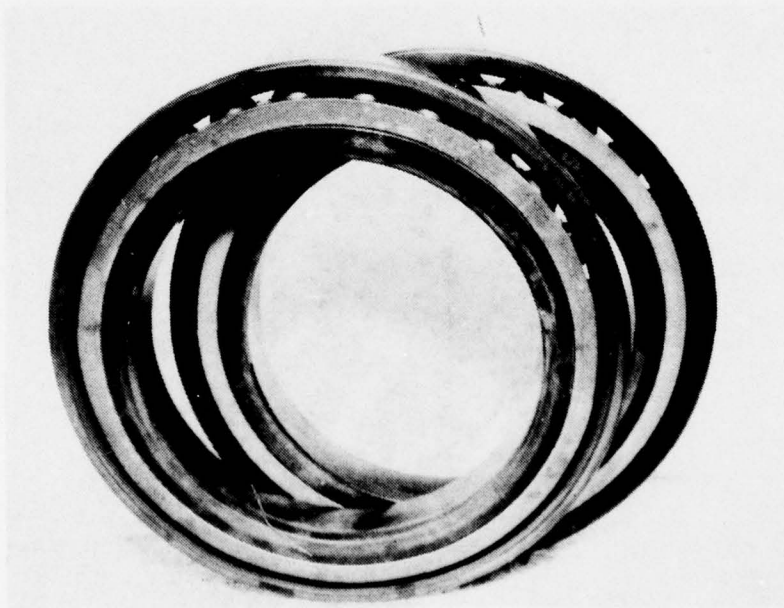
Input gearshaft duplex bearing after fourth loss-of-lube test.
